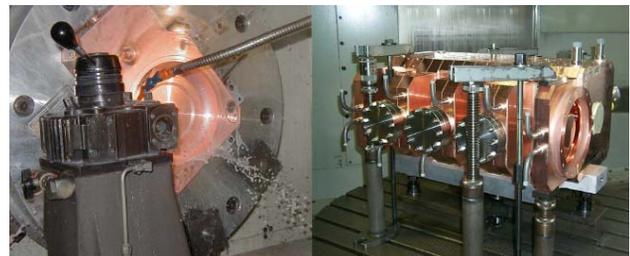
CCL accelerating cell during turning (left) and CCL segment after final braze on mill to get final length
